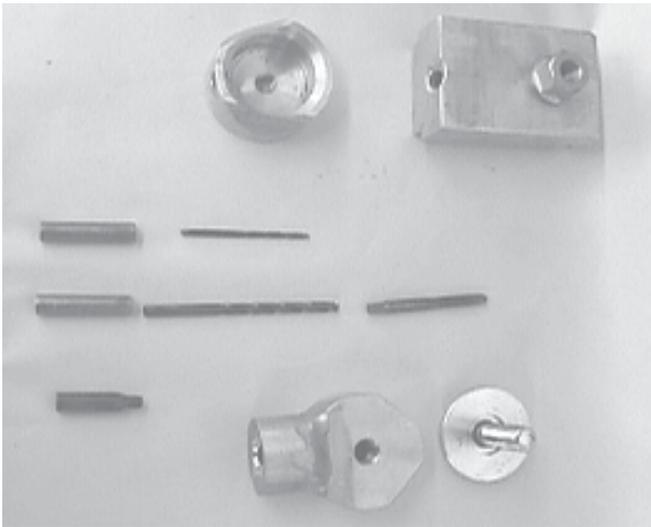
Here's the three drill alignment fixtures and bushings for drilling and tapping the A-Arms and then drilling through the installed bushings to the rotating surface. The three fittings allow straight or angled penetrations as require for optimum lubrication distribution and installed access.
